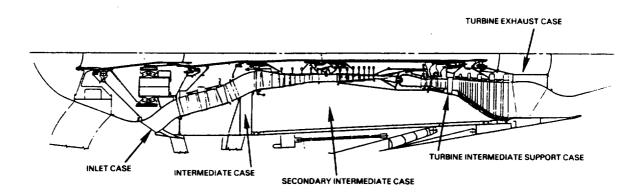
Cross Section of the Three Spool 266,892 N (60,000 lb) Thrust Engine, Candidate 3, Showing Additional Support Cases
